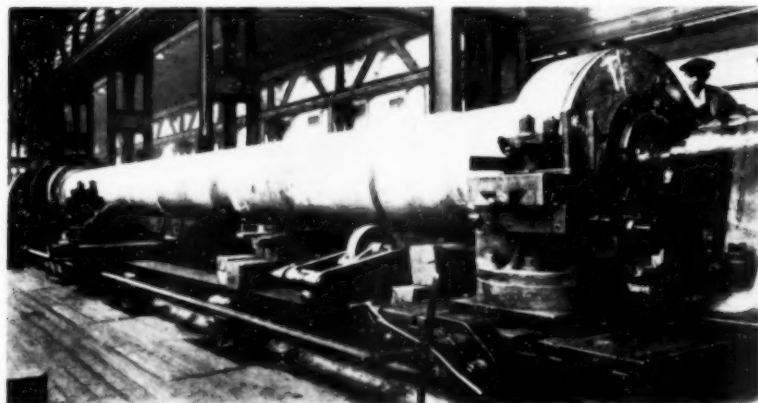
Machining a forging for a pressure vessel having separate covers.
